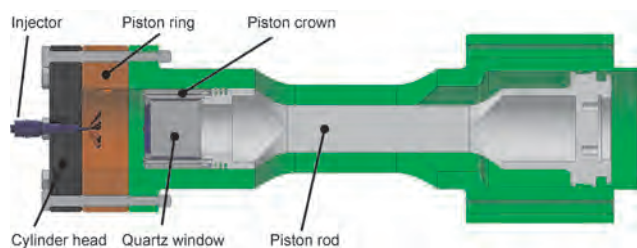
Schematics of a Rapid Compression Machine with optical access to the combustion chamber
